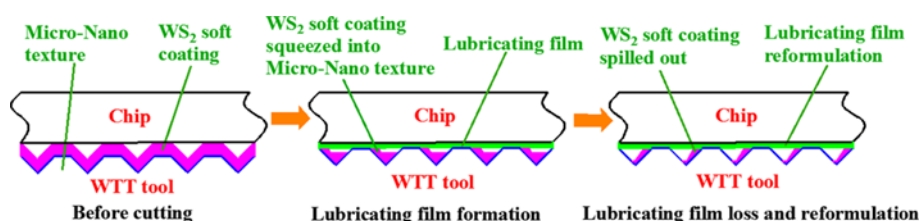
Self-lubricating mechanism of WTT tool in cutting process
